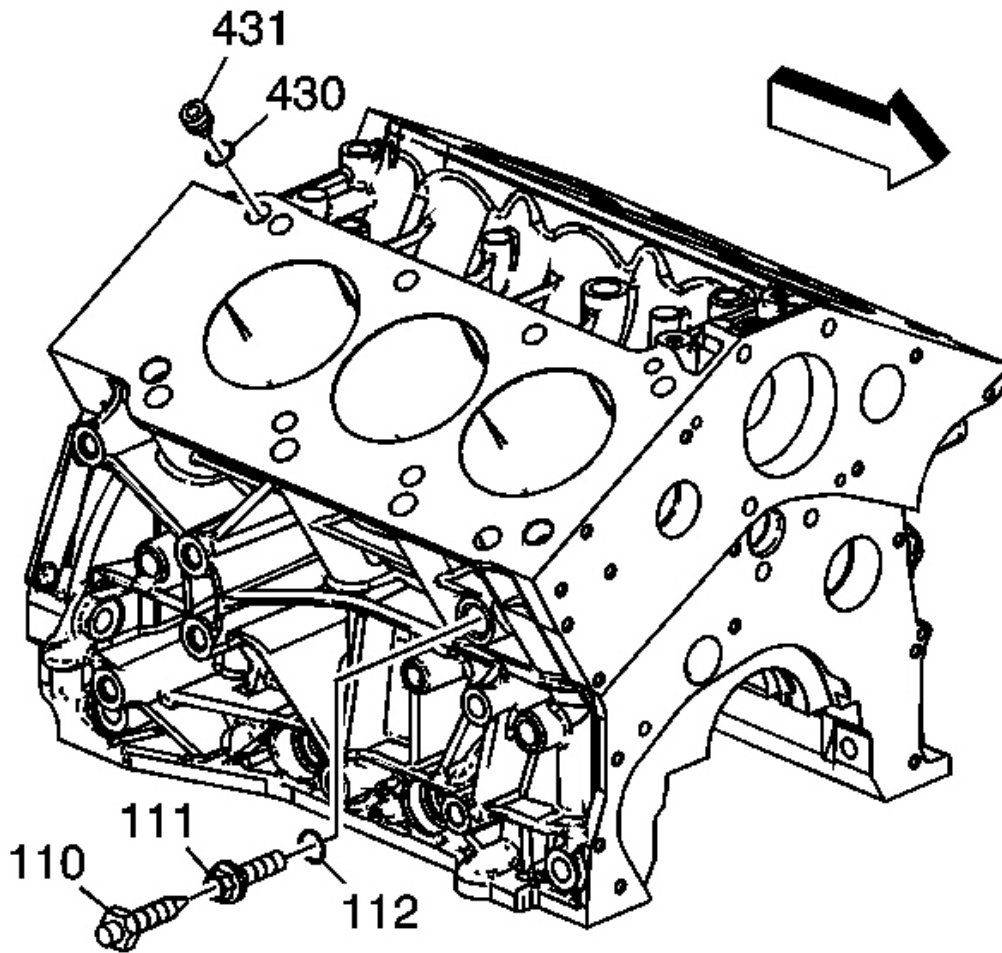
Identifying Restrictor, O-Ring, Washer, Fitting & Drain Plug
